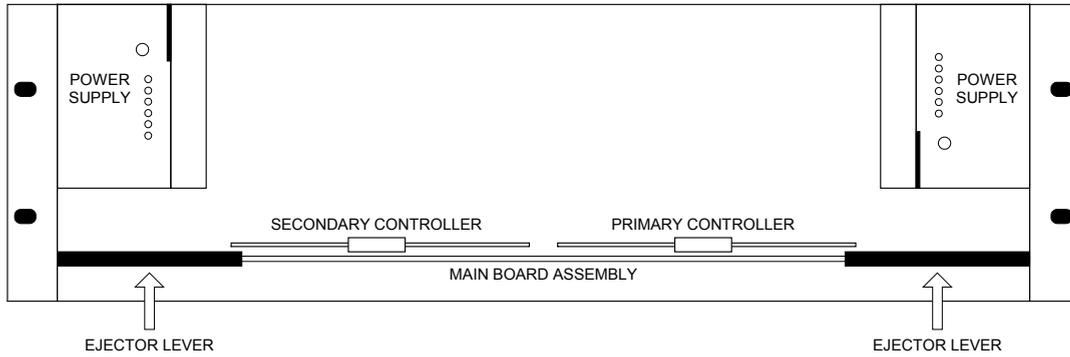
Chassis Assembly with Front Cover Removed
